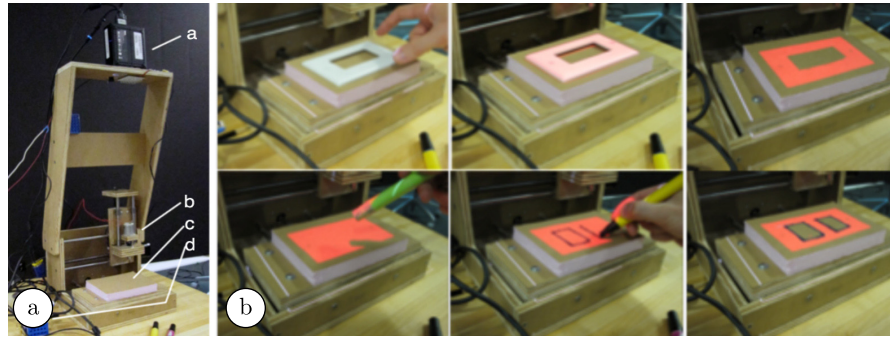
In *CopyCAD* [Follmer et al., 2010], users draw with a pen on the workpiece, the milling machine then mills the path accordingly.
